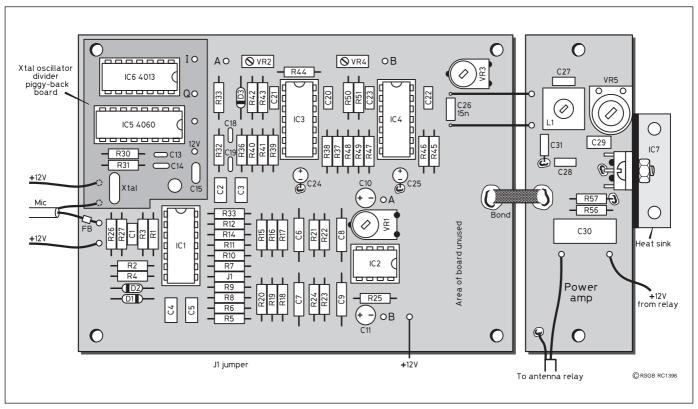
Transmitter board showing the component layout with the crystal oscillator divider piggy-back board in the top left-hand corner.
